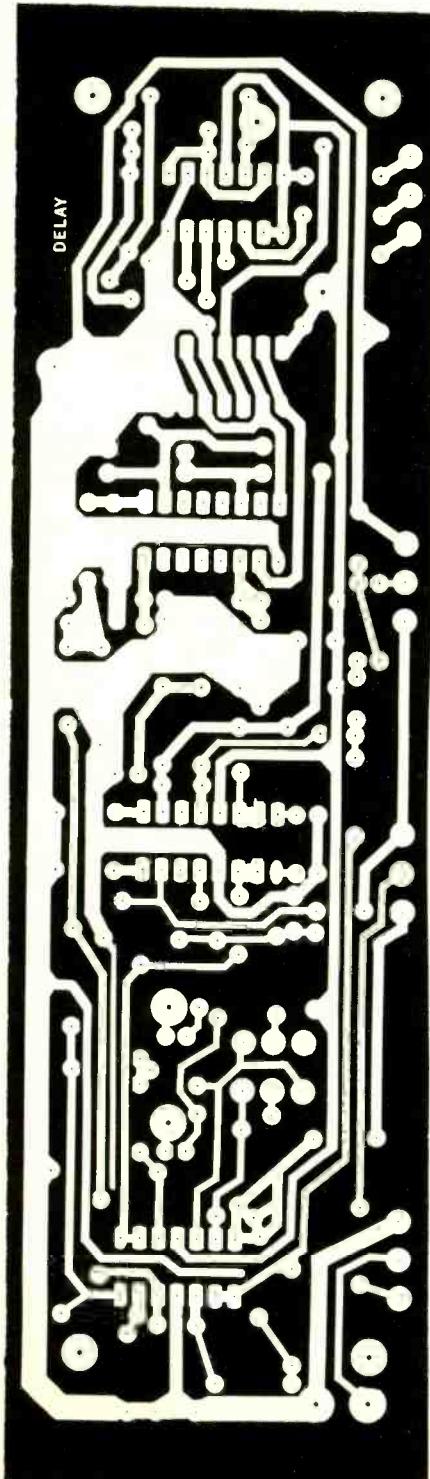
Full-size etching and drilling guide for the main printed-circuit board.
